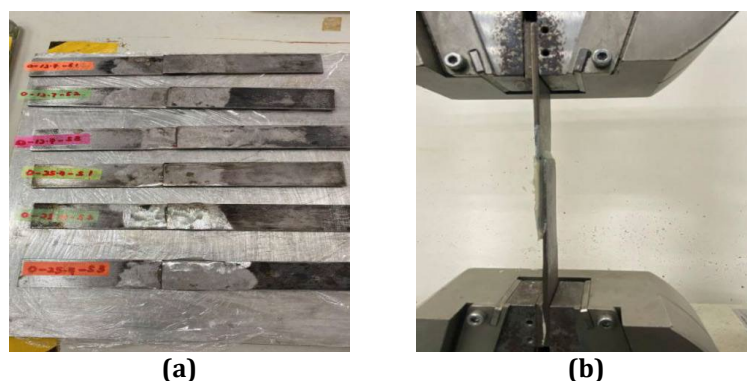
(a) SLJ specimens ready for mechanical testing; (b) mechanical testing using UTM machine
